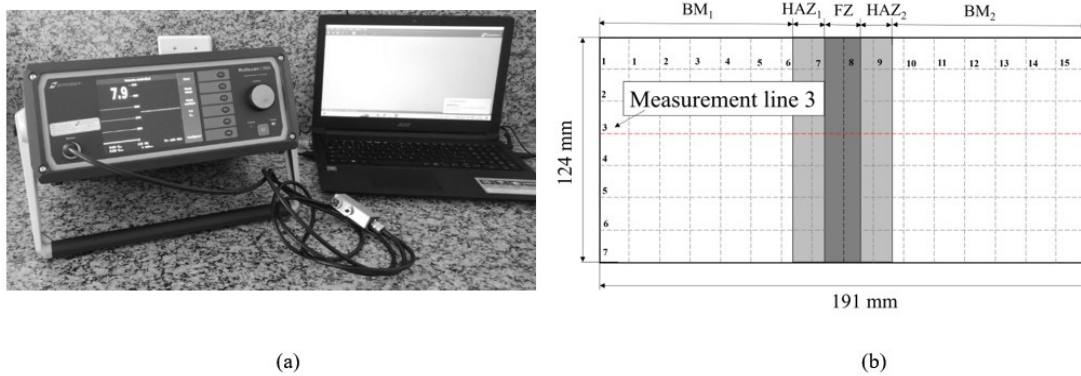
MBN signal measurements: (a) equipment arrangement and (b) measurement grid of the welded sample.
